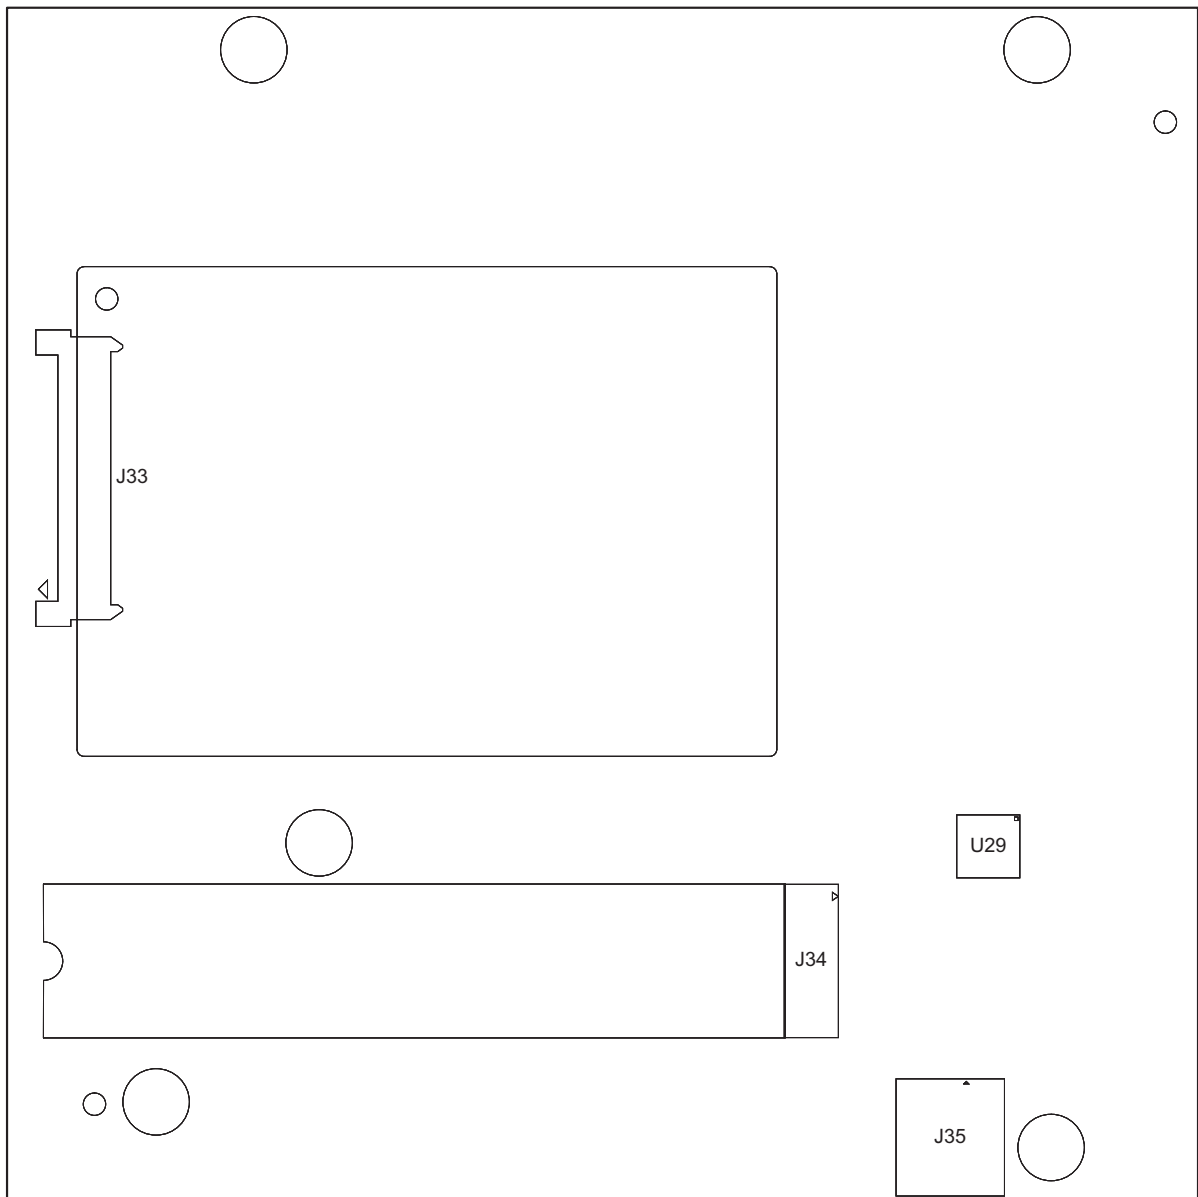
COMe Ref. Carrier-i T6 TMI Layout - Bottom View
